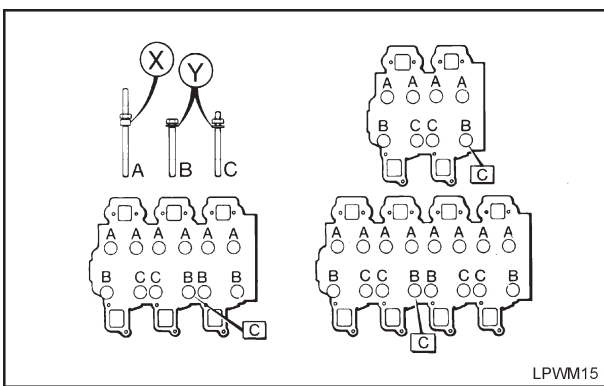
Head Bolt Locations - LPW /LWS
